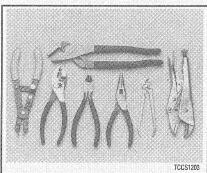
An assortment of pliers, grippers and cutters will be handy for old rusted parts and stripped bolt heads
